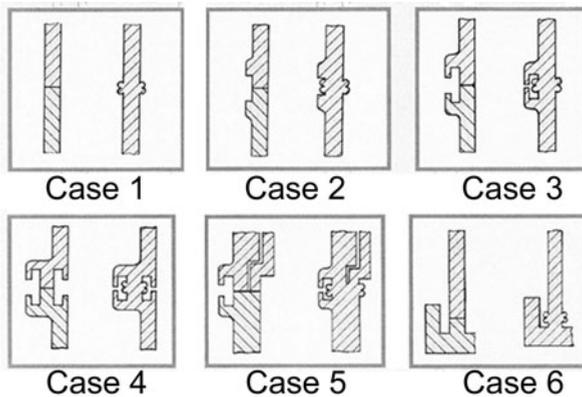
Typical examples of hot blade welding joints.
